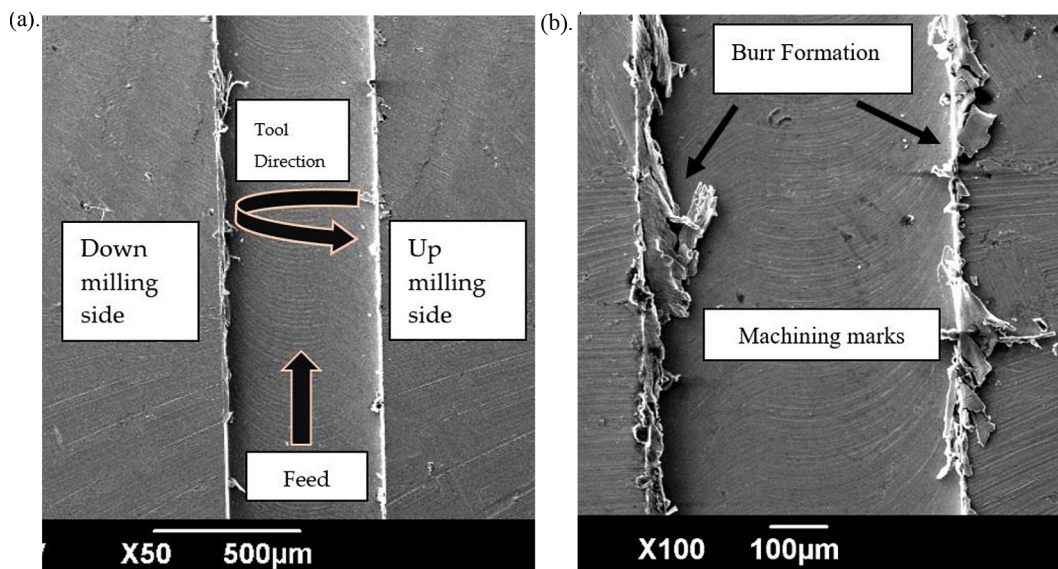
(a) Categories - down milling and up milling; (b) magnified burr formation and machining marks on finished surface
